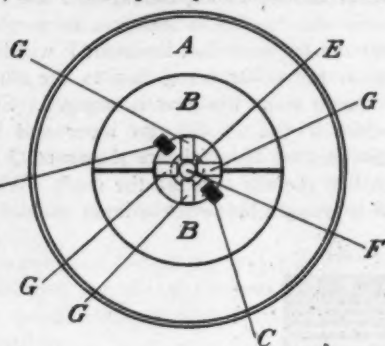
ONE GEAR AND ITS CLUTCH.
